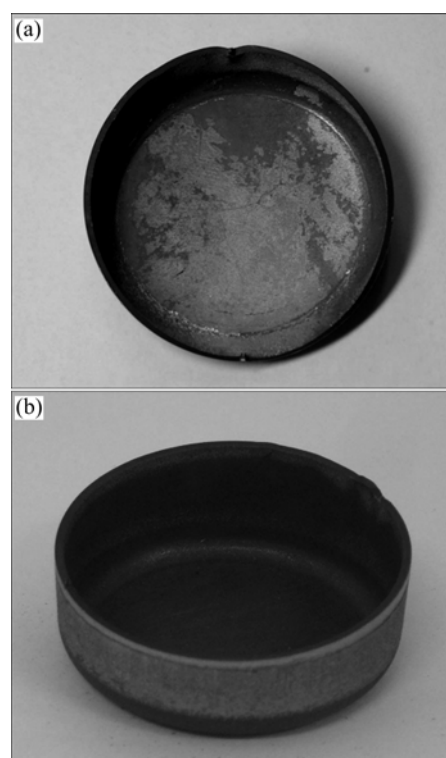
Specimens after deep drawing: (a) 800 °C; (b) 900 °C
